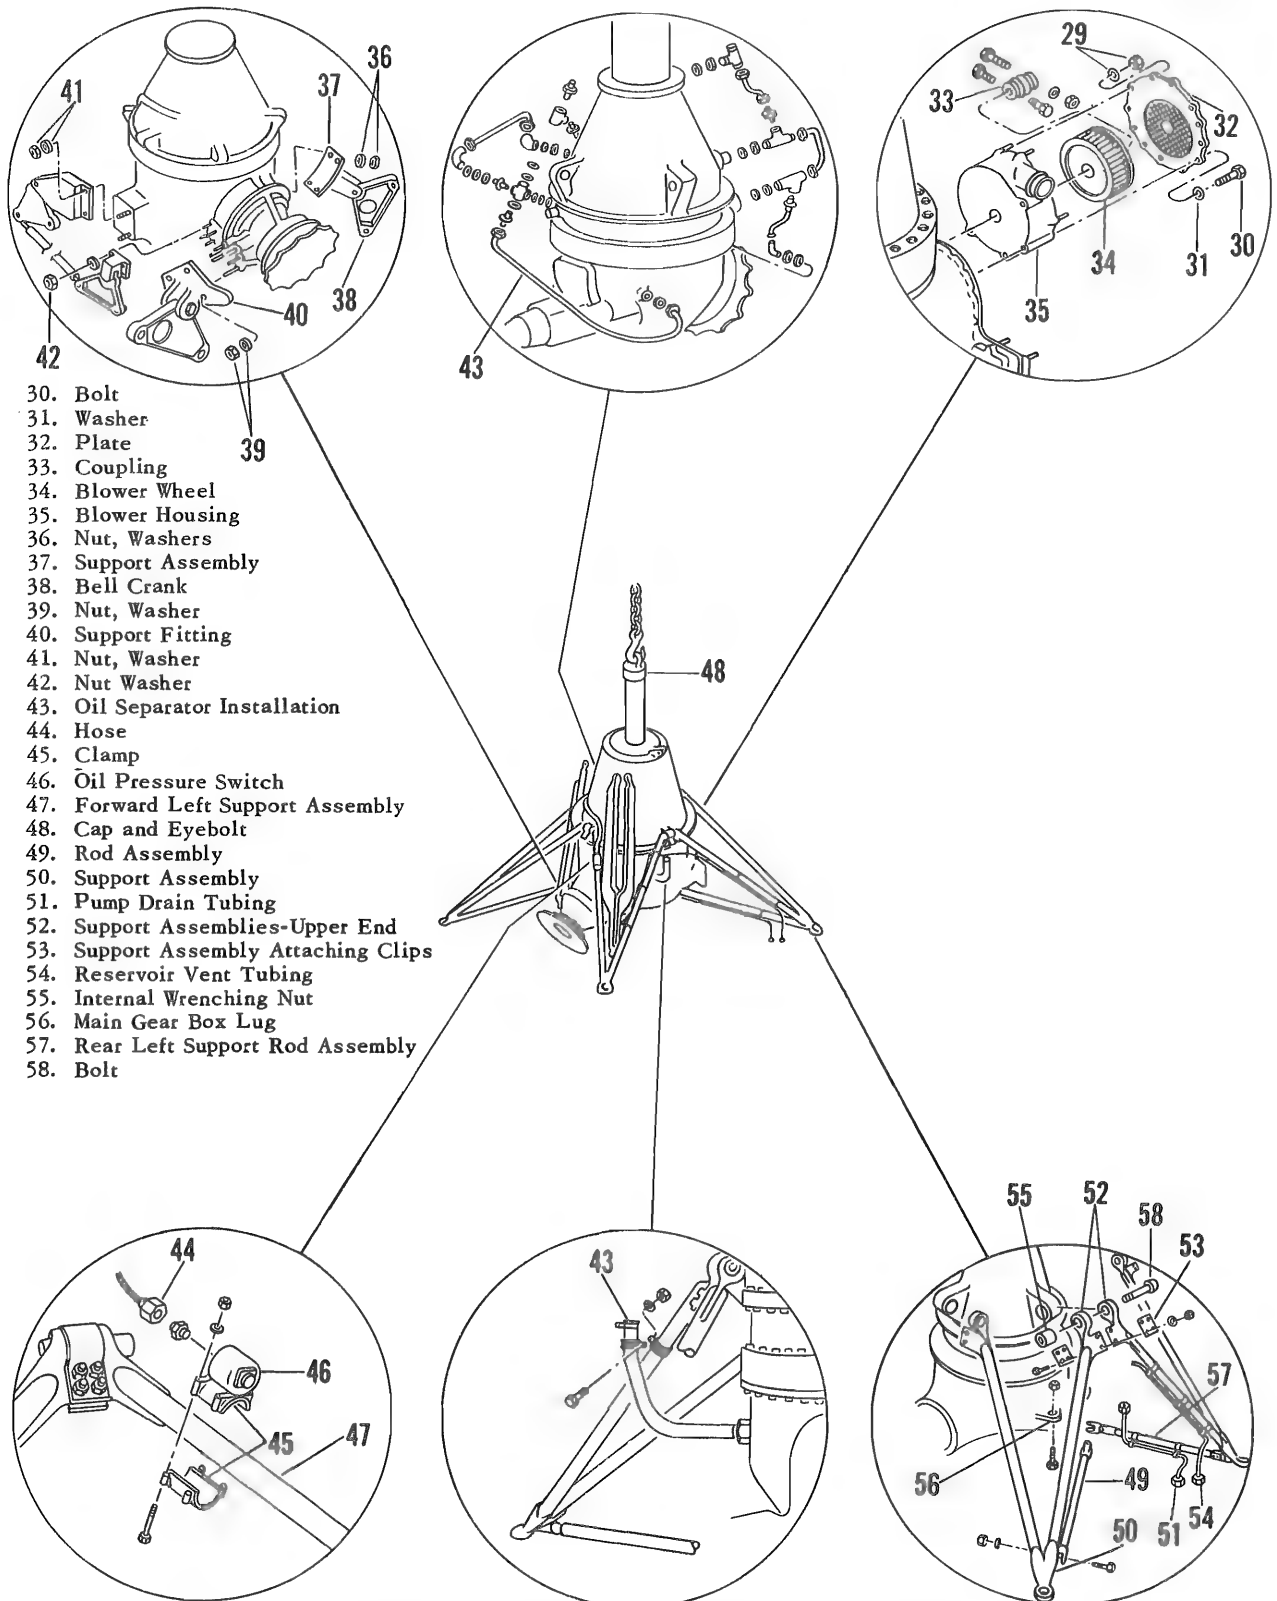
Main Gear Box and Rotor Quick Change Unit Disassembly (Sheet 2 of 2)
